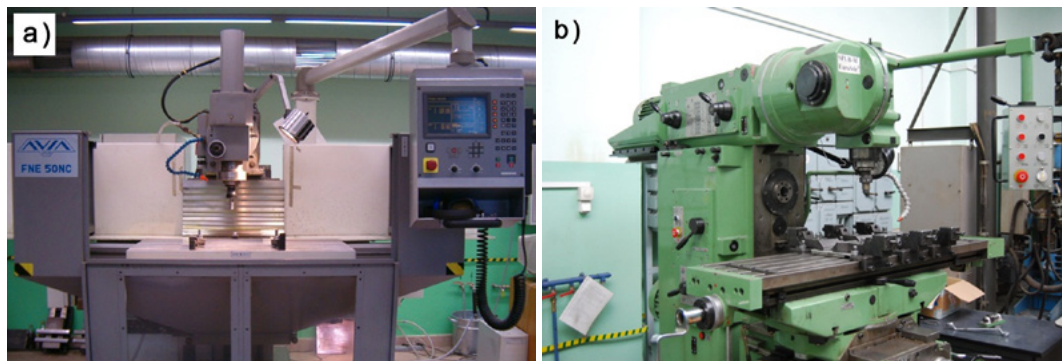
FSW welding stations: a) numerically controlled milling machine AVIA FNE 50NC; b) vertical conventional milling machine FYF32JU2
